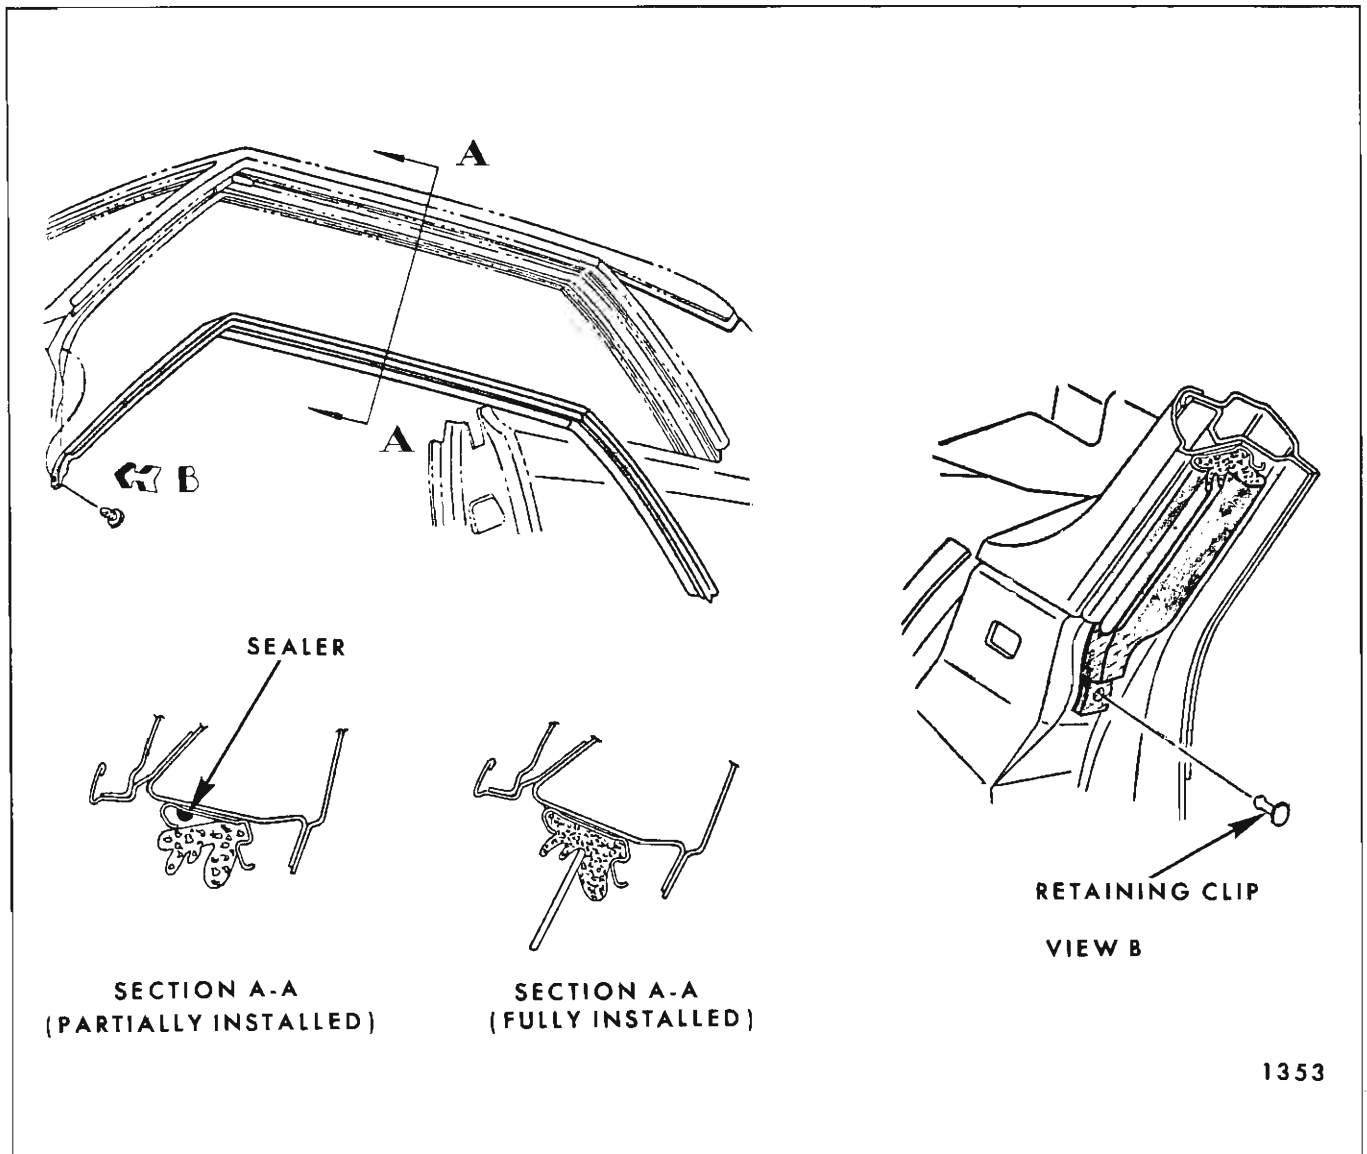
D43—Side Roof Rail Weatherstrip Assembly
